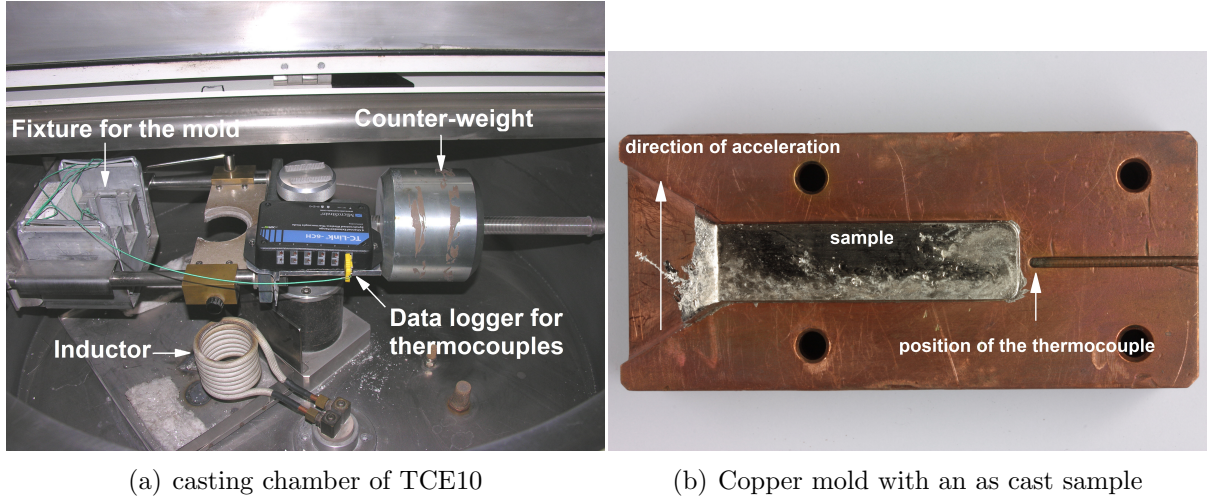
Centrifugal casting; (a) photograph of the casting chamber with the rotatable casting arm, fixture for the mold, inductor, counter weight, and data logger for temperature monitoring with thermocouples; (b) copper mold for the casting of an amorphous sample with a centrifugal cast sample still inside the mold; previously published in [13, 14, 15].
